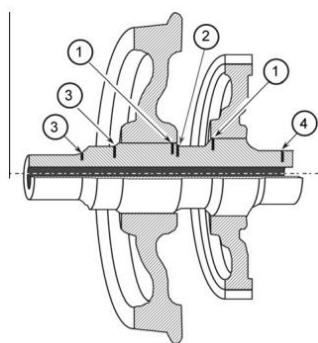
Typical locations of fatigue cracks in railway axles comprise (1) cracks resulting from press fit underneath the wheel and gear; (2) cracks originating at the geometrical transition of the T notch; (3) cracks arising at the geometrical transitions of the U or V notch; (4) cracks emerging at the shaft, commonly situated at corrosion pits; according to [40]
